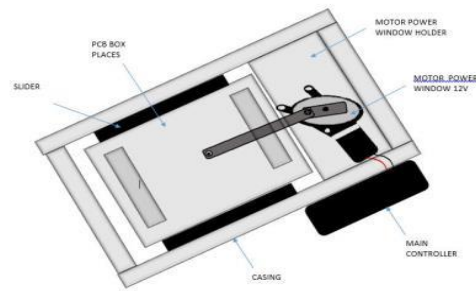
Block Diagram of Mini Etching PCB Machine
